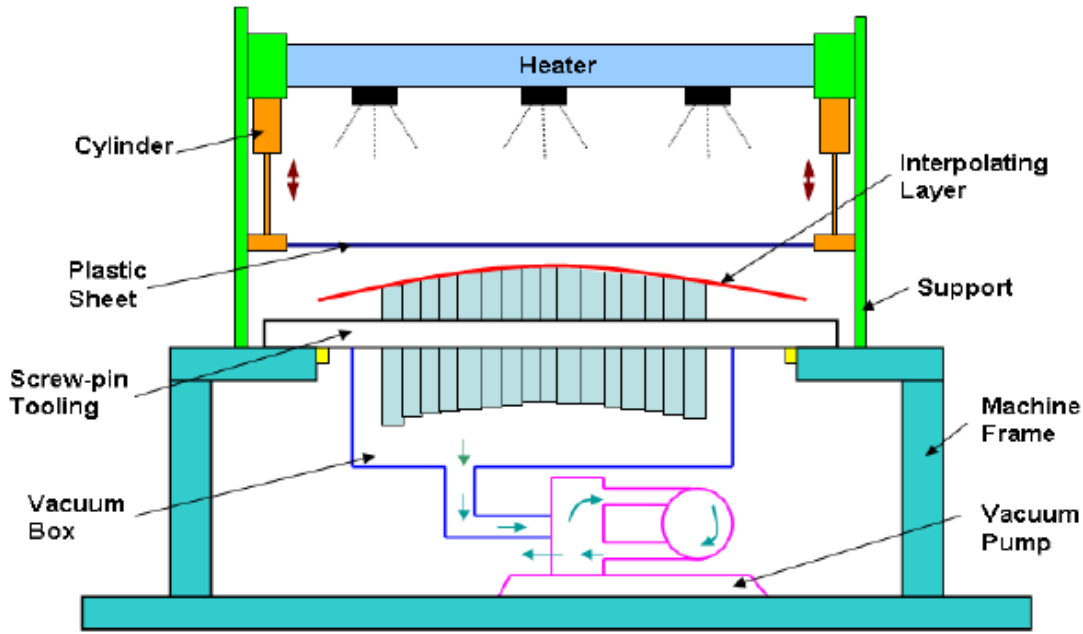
How reconfigurable vacuum forming tool would work [59]
